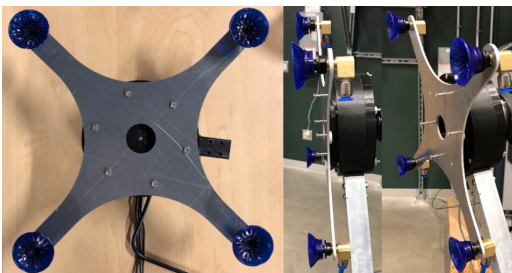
Pneumatic Components Assembly. A Physical Representation of the Implementation of the Pneumatic System as Depicted in Figure 7.
